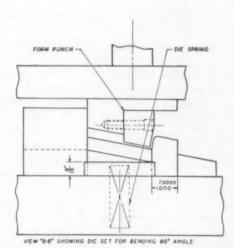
D. Cross-section of standard forming die with tooling set for right angle bends.
